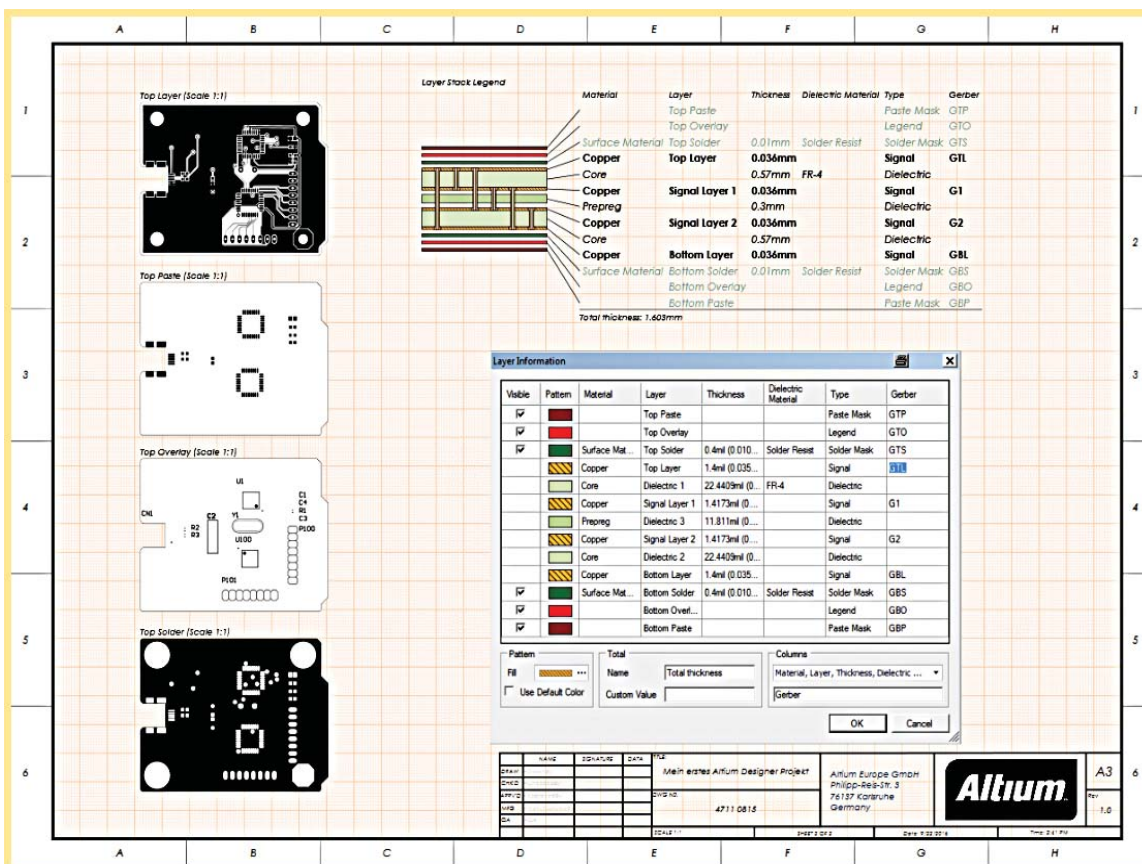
Example drawing from Draftsman with details for the PCB fabricator.
